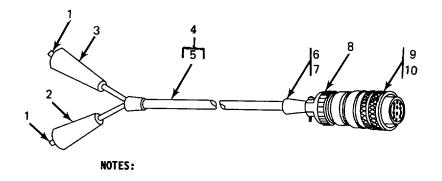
A.C. POWER CORD ASSEMBLY (80-10110A)
